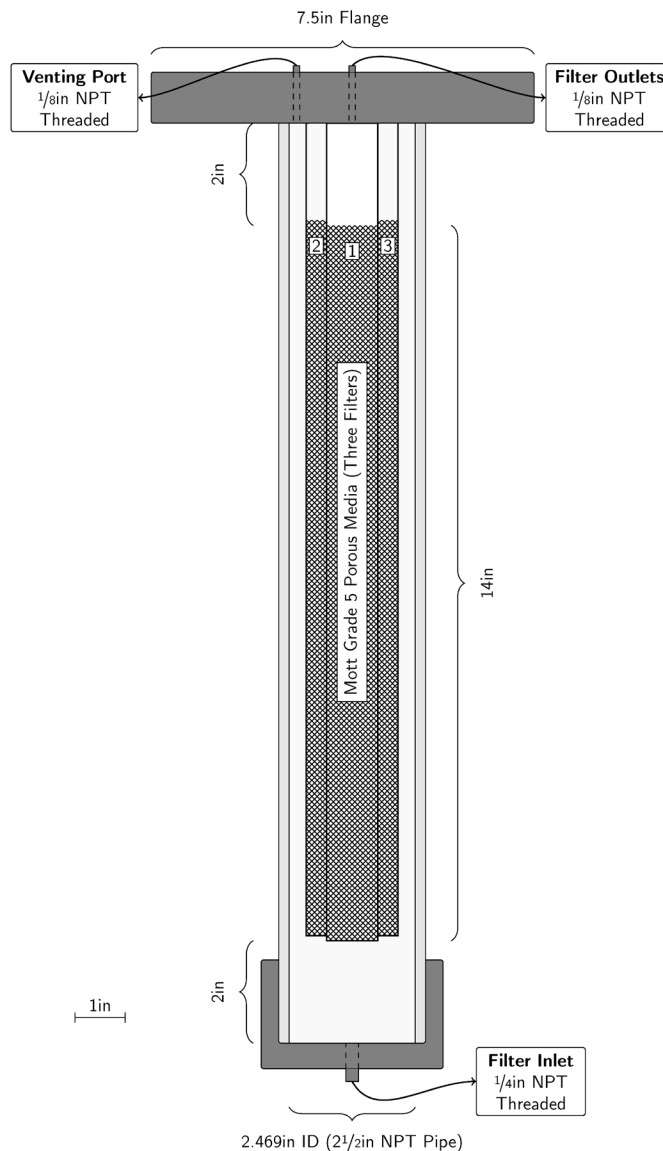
Side view diagram of the 200W-scaled DEF module. Dimensions indicated on the diagram were the design targets for the fully assembled module.
